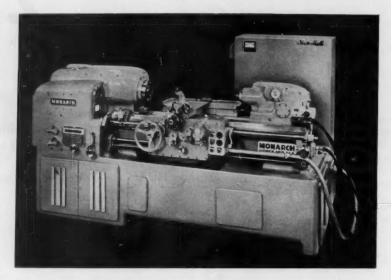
Precision turning lathe for manufacturing and toolmaking applications developed by Monarch Machine Tool Co.
